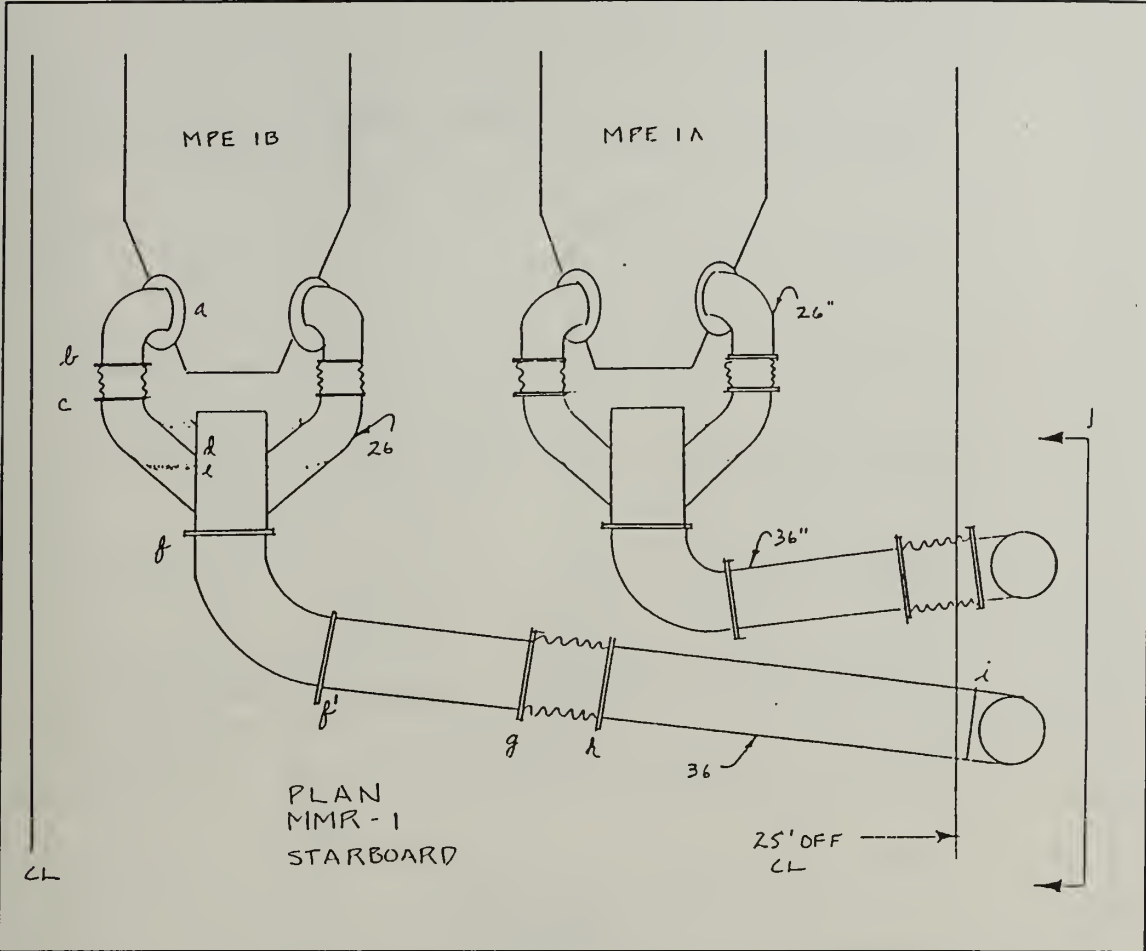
LSD 41 Class Starboard MPE Exhaust System - Plan View
